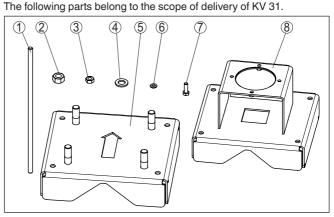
Mounting bracket for pipes irradiated at right angles KV 31, horizontal sensor mounting
